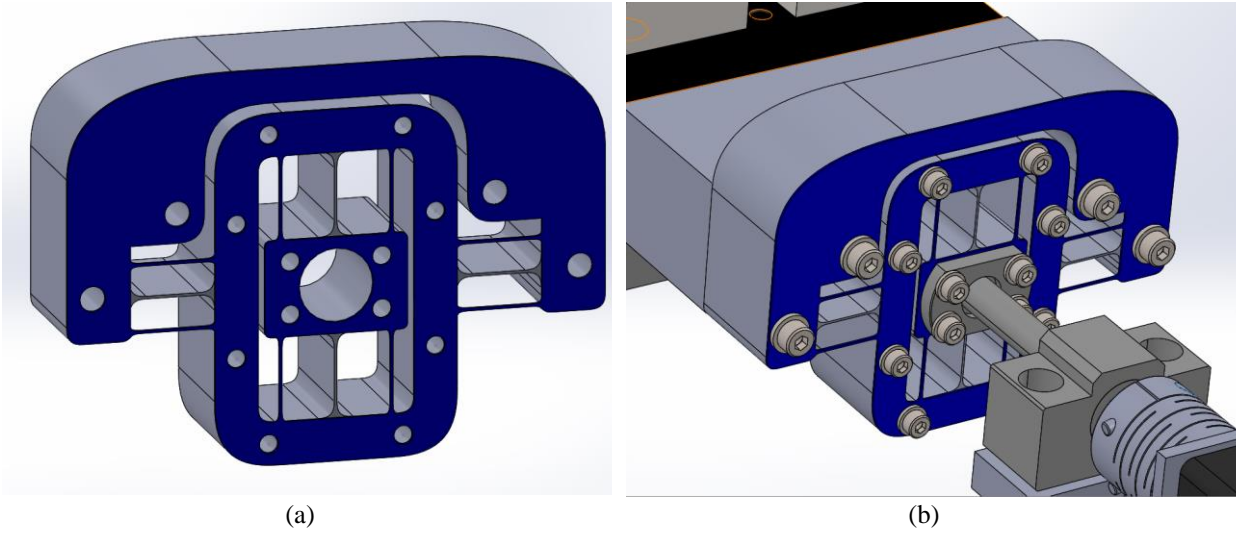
CAD model of finalized decoupler design (a) the decoupler body and faceplate (b) assembled and mounted in the drivetrain
